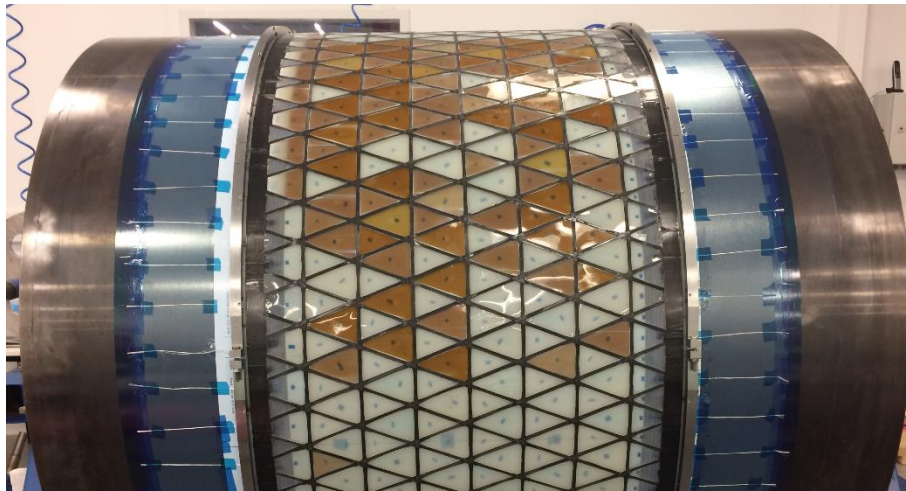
Large cylinder layup on the mandrel, before covering with caul plates. Re-used tooling clearly visible.
